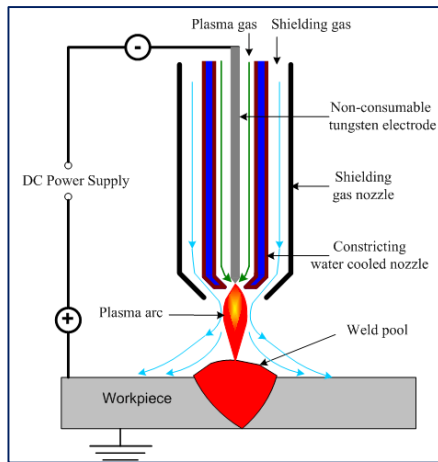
Plasma Arc Welding Process [32]
